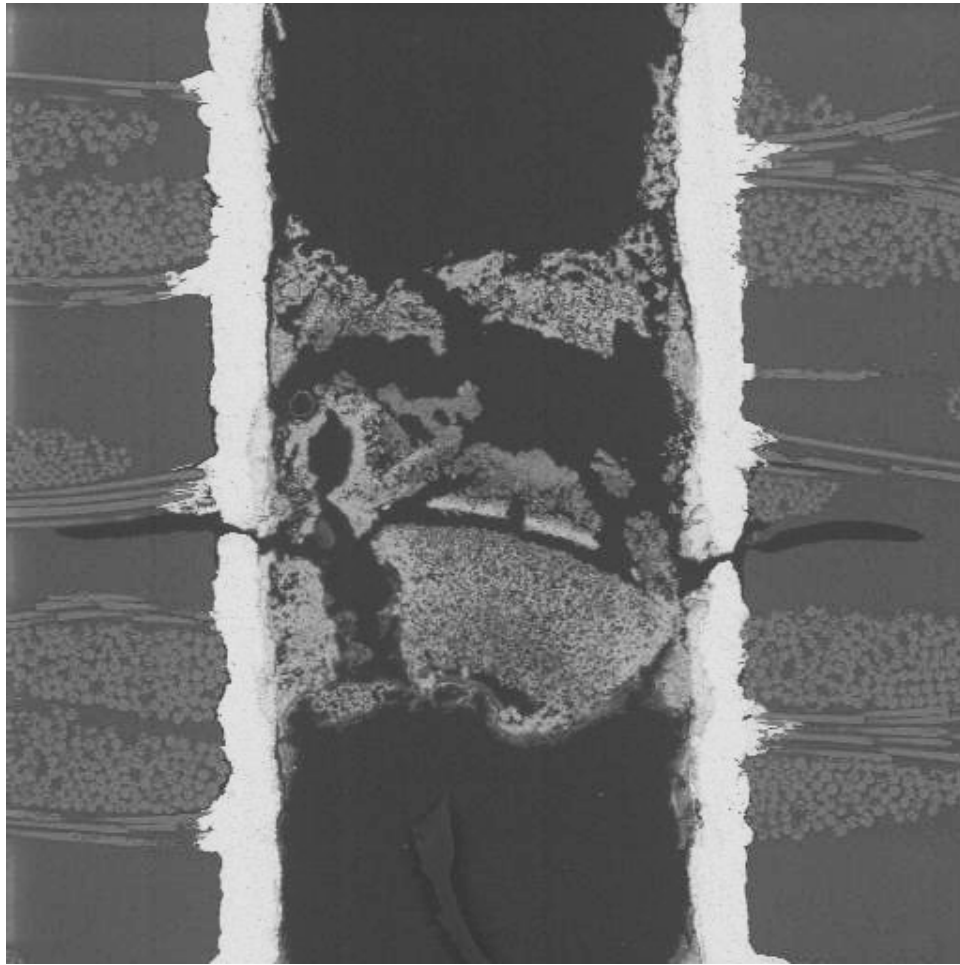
Case 1080: via microsection showing copper corrosion product near the barrel fracture. The image supports a combined mechanism involving a plating defect, flux entrapment, and corrosion.
